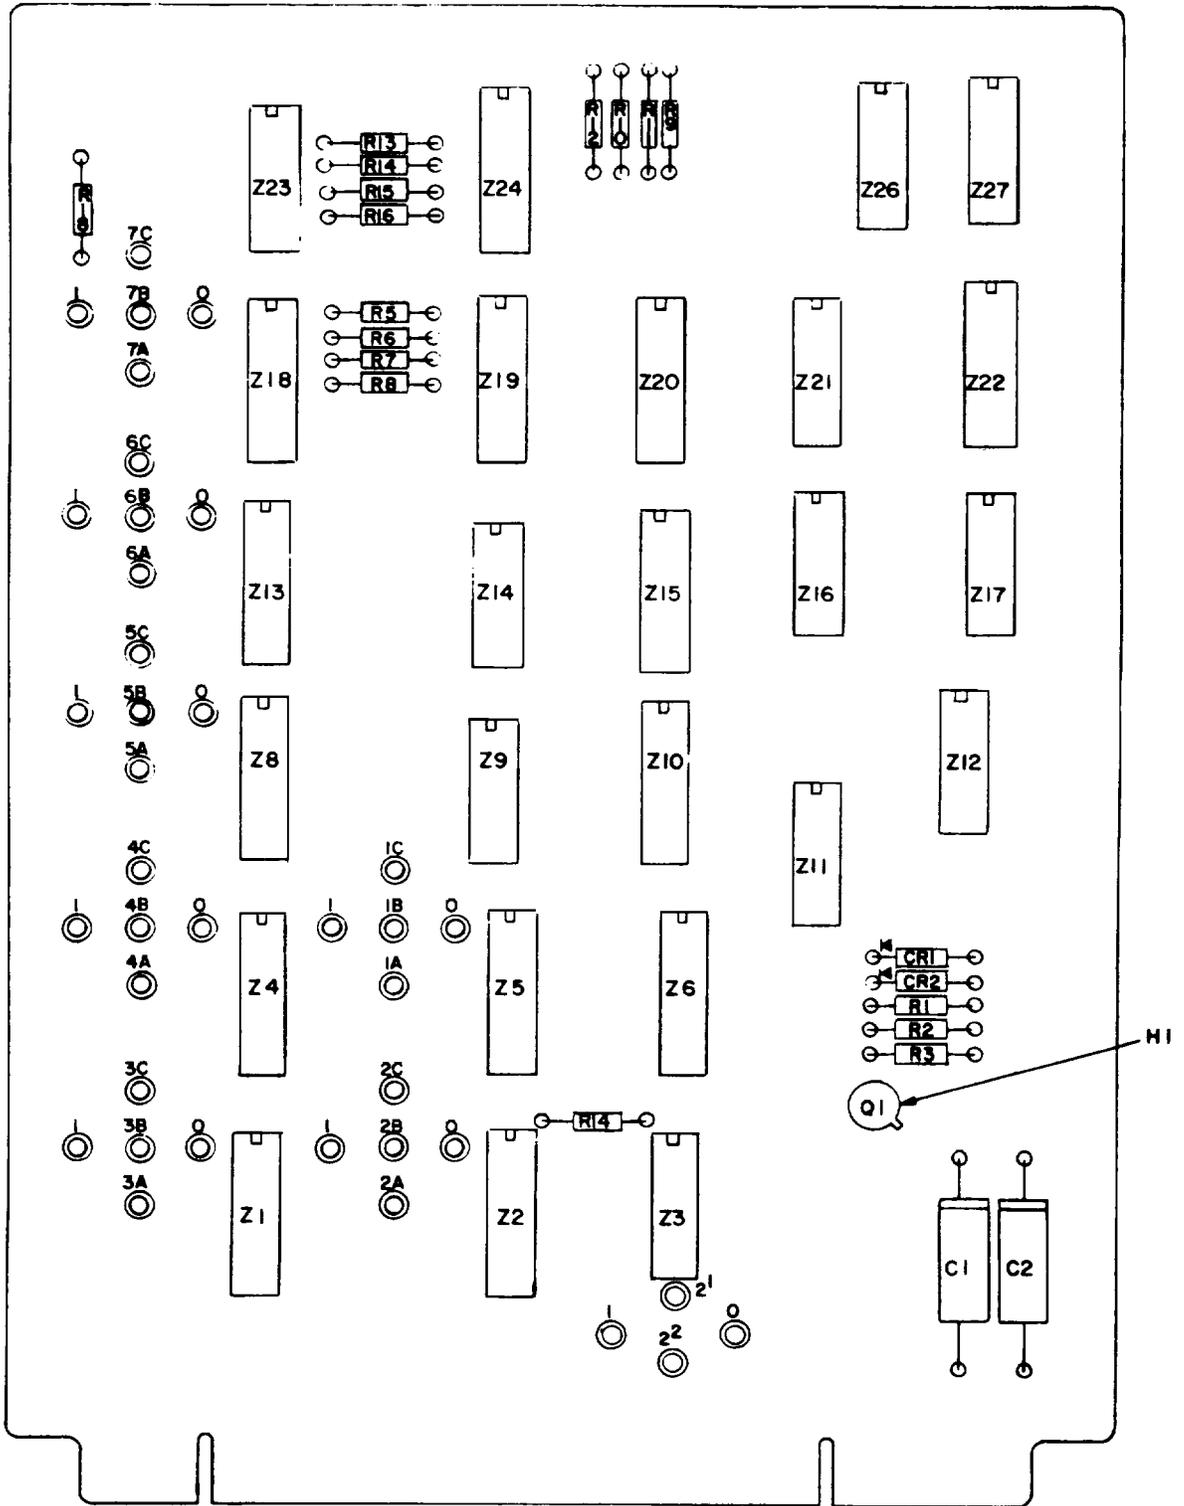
Power supply sequen7Te module component board assembly PSIA12, component location diagram.
